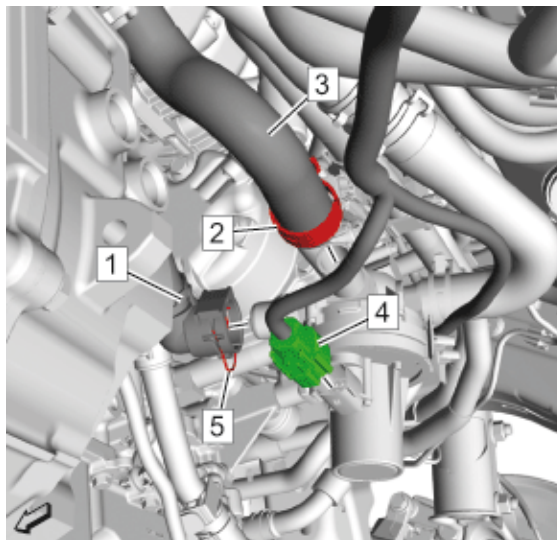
Heater Water Shutoff Valve Electrical Connector, Inlet Hose, Retainer, Heater Water Shutoff Valve Outlet Hose And Clamp
